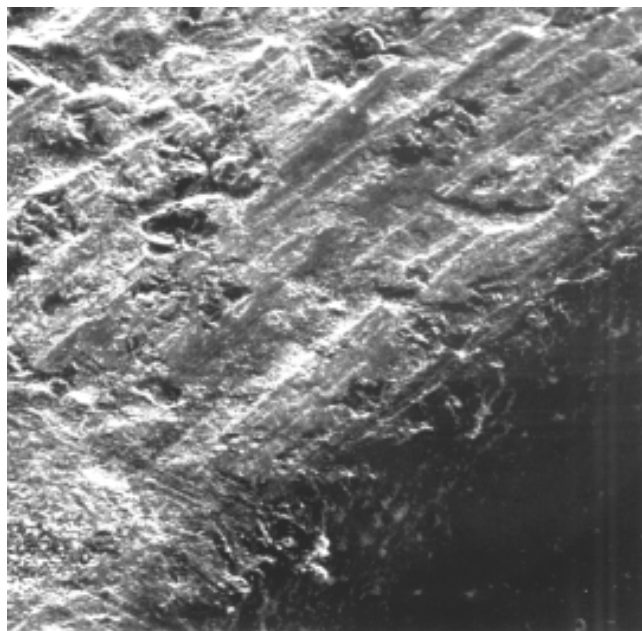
Grinding layer of a resin-bond CBN wheel with insufficient bond wear (dull layer).
